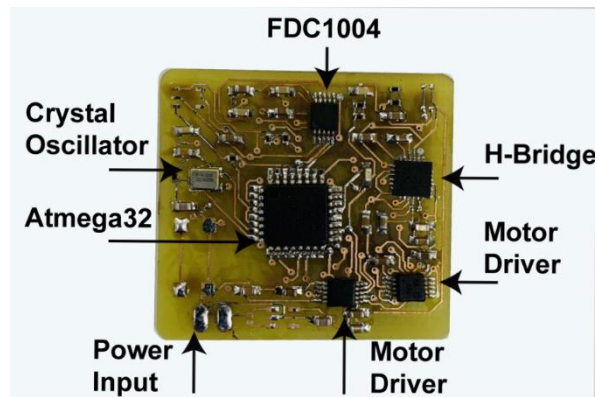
The actual picture of the fabricated miniaturized PCB with all the components mentioned.
